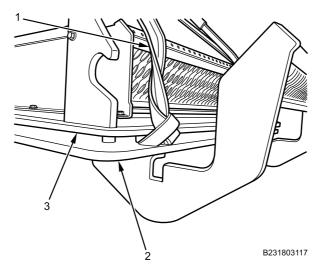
Loop Lifting Sling Around Door/Ramp Right Hinge.
